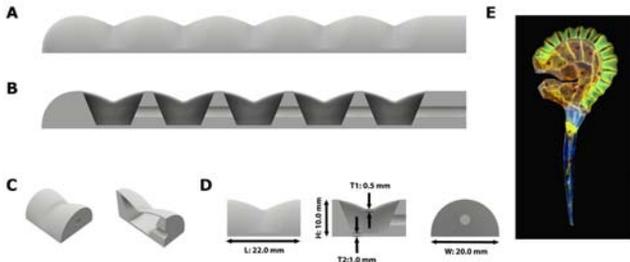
Soft vacuum actuators (SOVA). (A) Soft actuator computer aided design (CAD) model (B) Section view of soft actuator CAD model. Pneumatic hinges are connected through a 3.0 mm diameter hole. (C) Pneumatic hinge CAD model (D) Pneumatic hinge dimensions. L: Hinge Length, T1: Hinge Wall Thickness, T2: Hinge Base Thickness, W: Hinge Width (E) Annulus of fern sporangia (Used with permission) (4).
